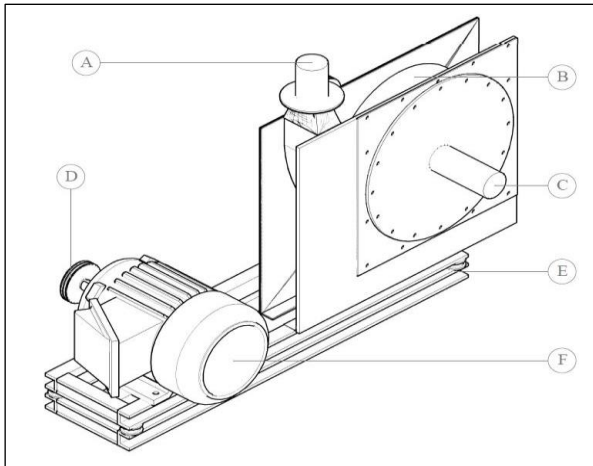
The hammer mill (A-Outlet to Cyclone A, B-Involute, C-Maize Inlet, D-Pulley, E-Base Support and F- Electric Motor).
